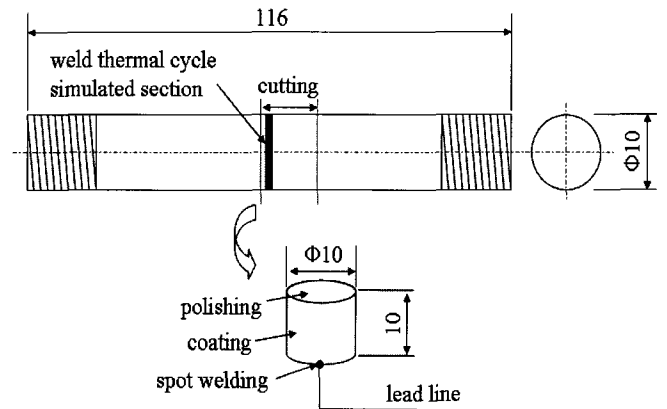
Shapes and dimensions of specimen (unit : mm)
